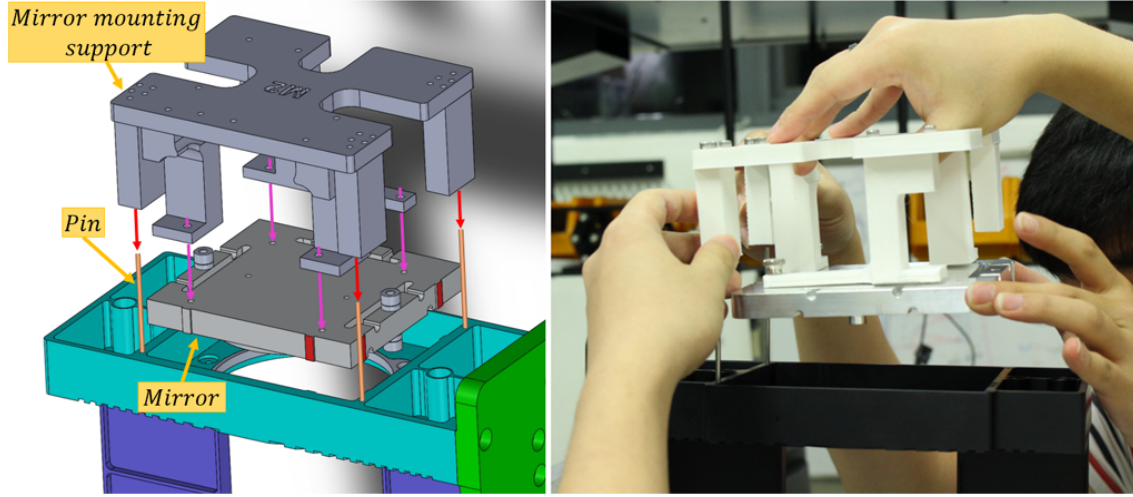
Accurate mirror mounting mechanism (left) and a picture of mounting the mirror (right).
